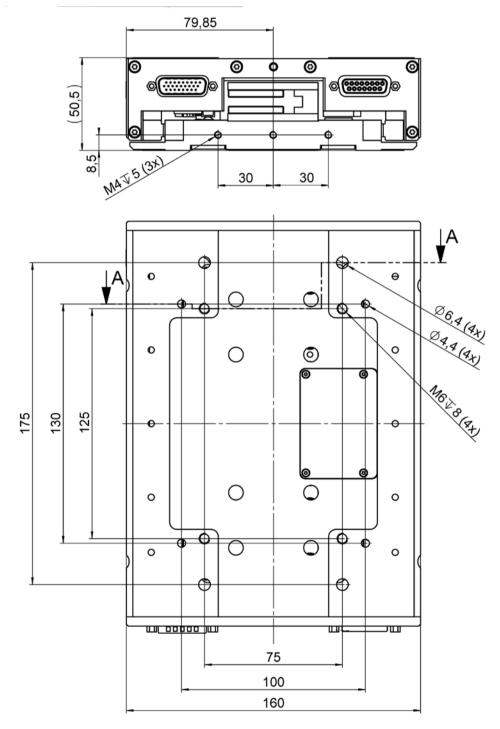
Dimensions of the V-551.2D: Side view and bottom
